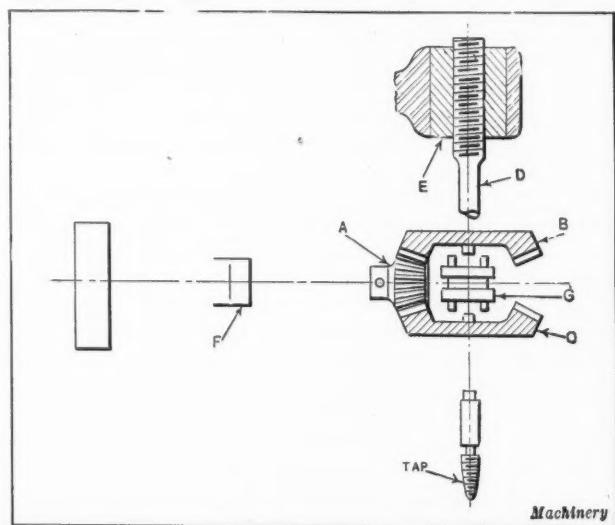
Diagram showing Automobile Parts arranged to form a Tapping Machine
